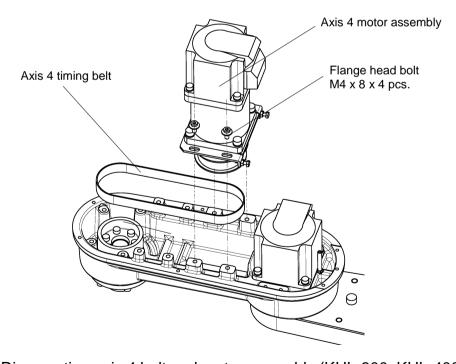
Dismounting axis 4 belt and motor assembly (KHL-300, KHL-400)
